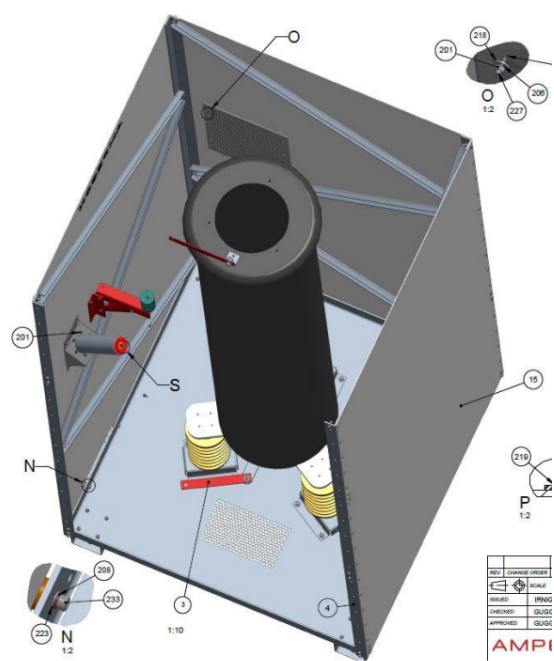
BPS DL of HVPS system layout at B15-L2
